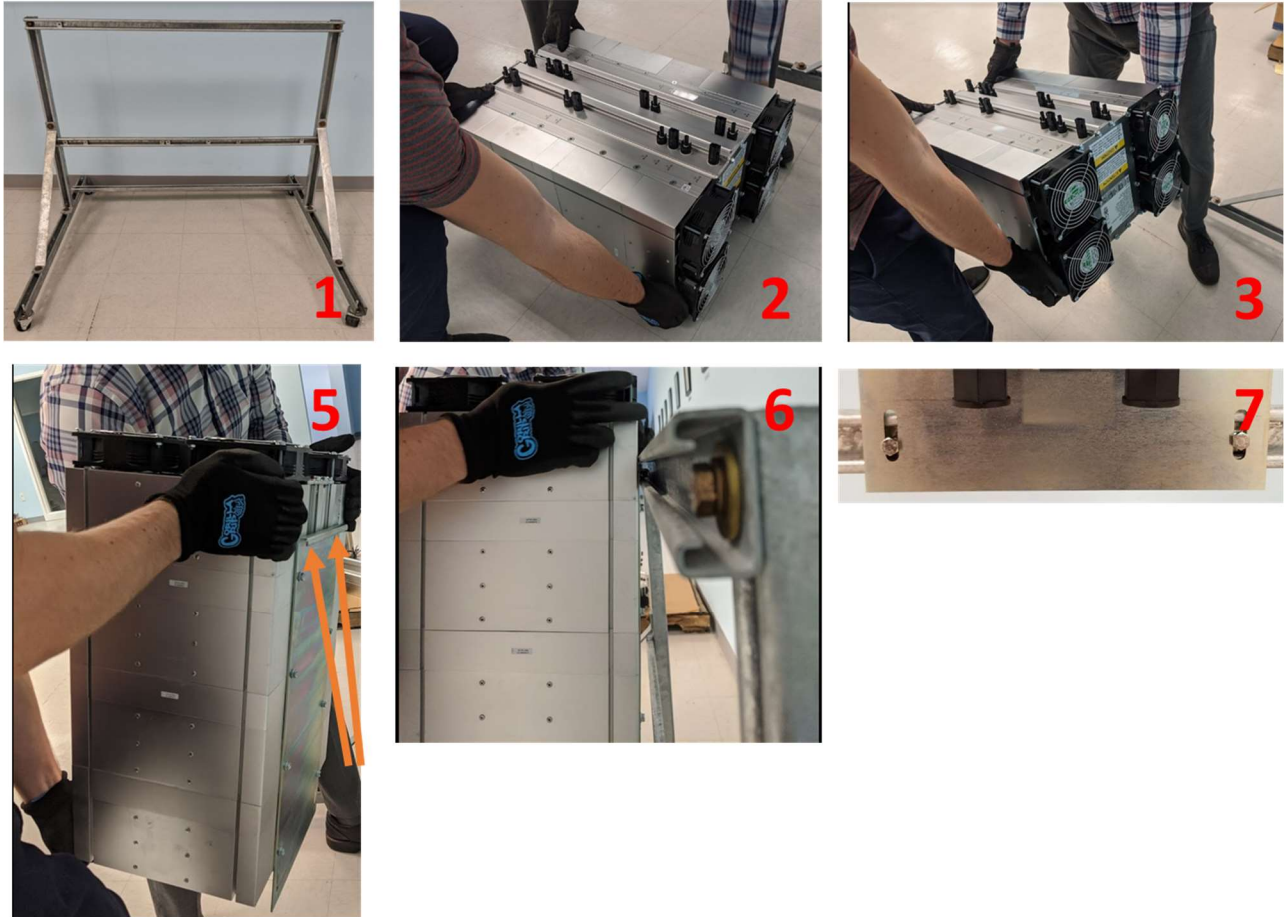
BOSS - VERTICAL MOUNTING INSTRUCTIONS
